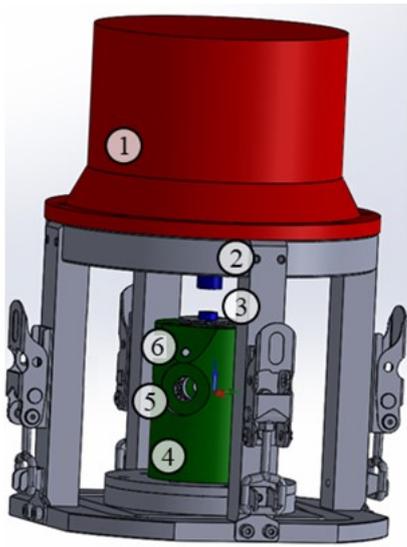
Schematic of VTT dynamic pressure calibrator with: (1) electromechanical actuator, (2) impact mass, (3) piston, (4) pressure chamber, (5) sensor port, (6) inlet for hydraulic fluid.
